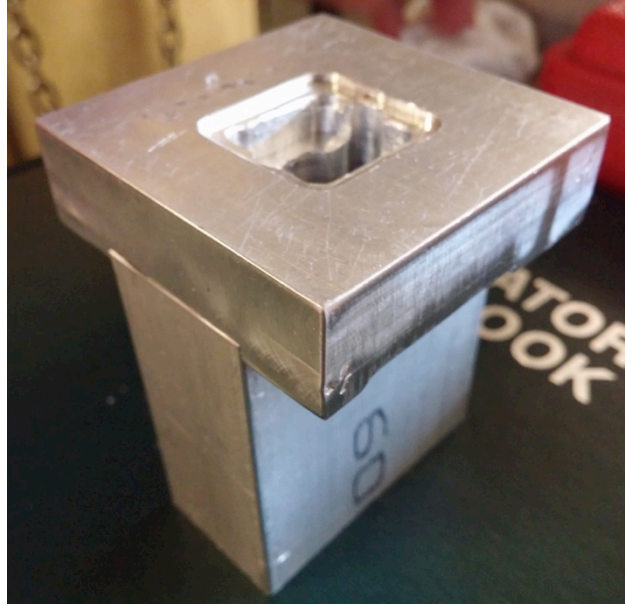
The assembled aluminum fixture. The hollow supporting bar provides enough space for the button stem to hang vertically.
